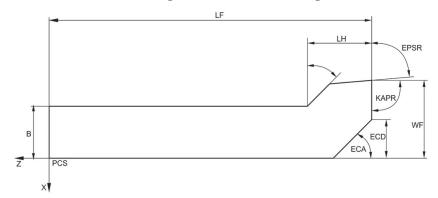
Sketch of turning tool No. 5 (offset end cutting design)
